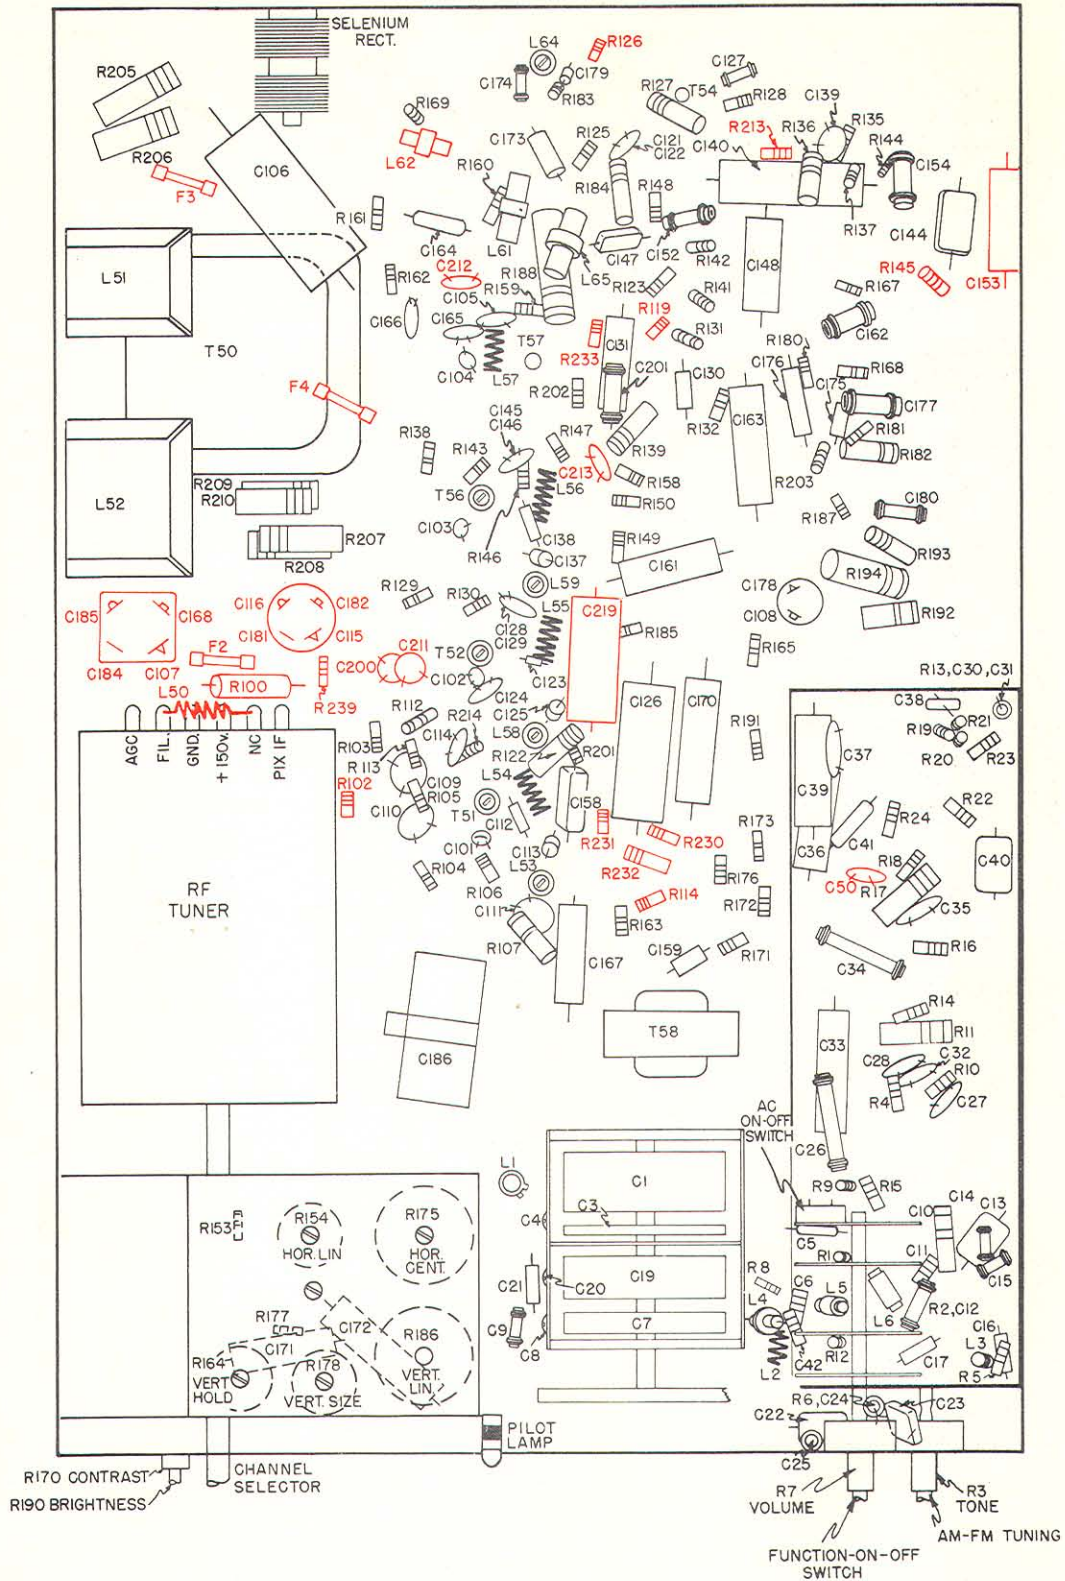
CHASSIS BOTTOM LAYOUT (C12, C13)
